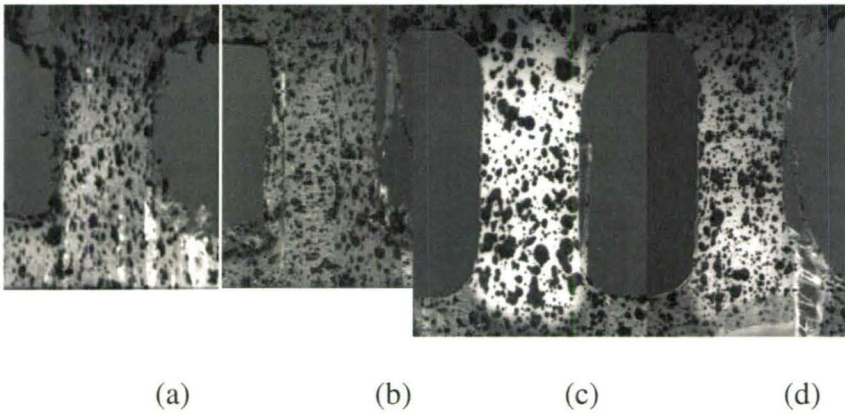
Fracture modes in test coupons cut from the tube along extrusion direction, (a) extruded, (b) bulged without axial feeding, (c) axial feed of 8 mm, and (d) axial feed of 18 mm.
